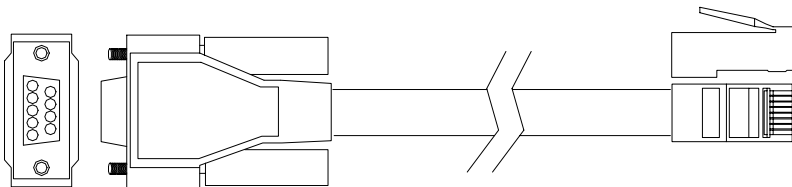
RJ45 Module-to-Computer Cable (P/N 4005-10)
